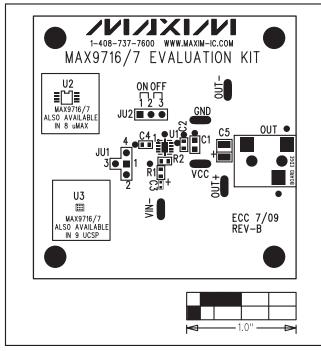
MAX9716 EV Kit Component Placement Guide—Component Side
